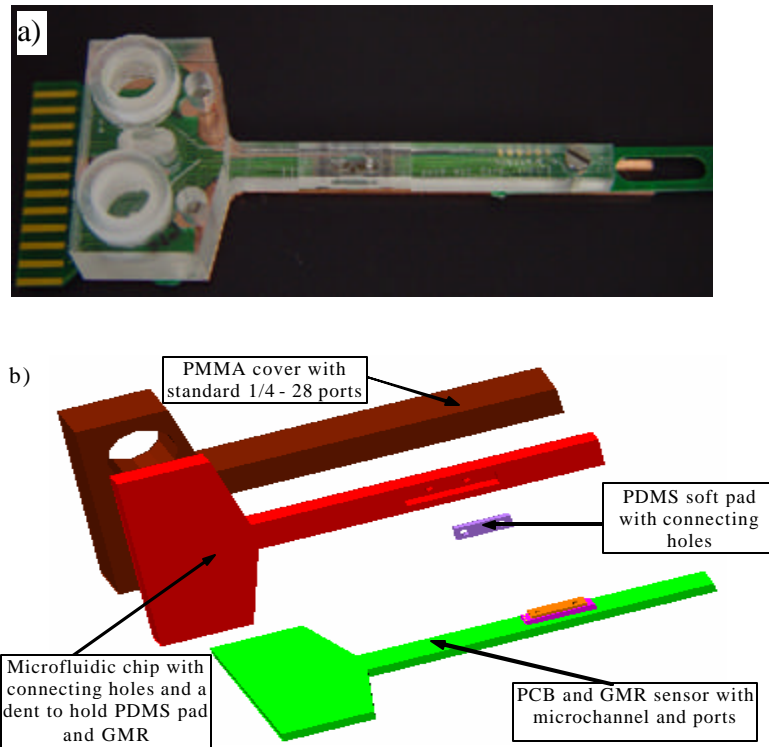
(a) assembly macro/micro connector with GMR sensor on PCB, and (b) 3D model of the fluidic connector for GMR sensor.
